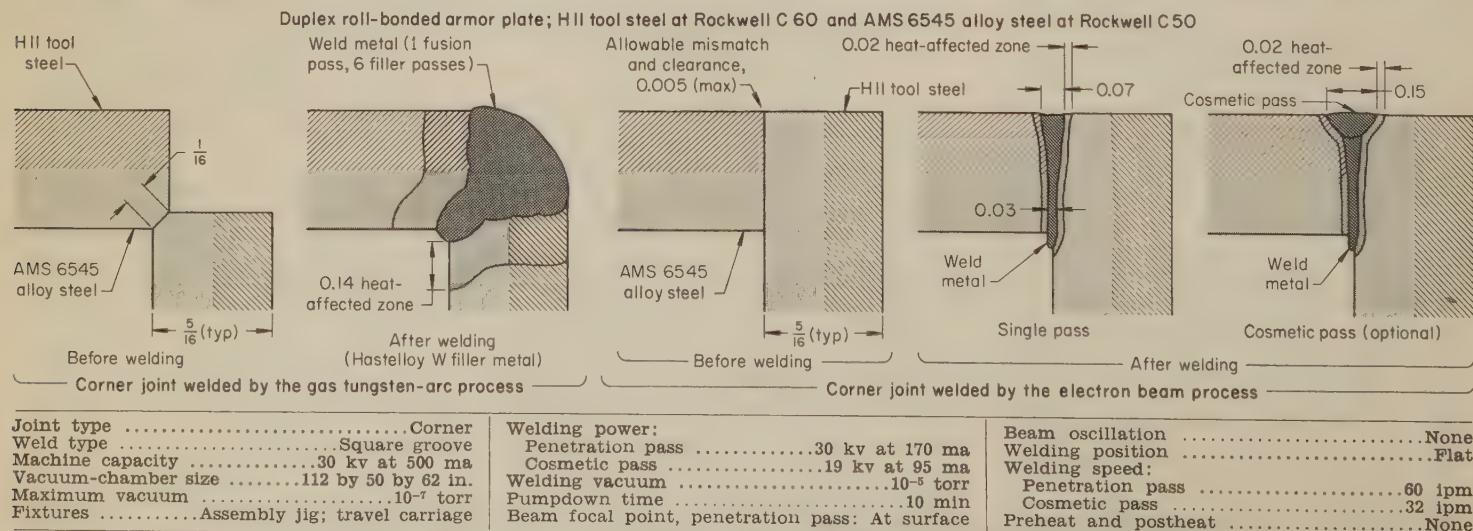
Cross sections through corner joints and welds made in duplex roll-bonded armor plate, showing approximate differences in sizes of the welds and the heat-affected zones resulting from electron beam welding and gas tungsten-arc welding (Example 471)
